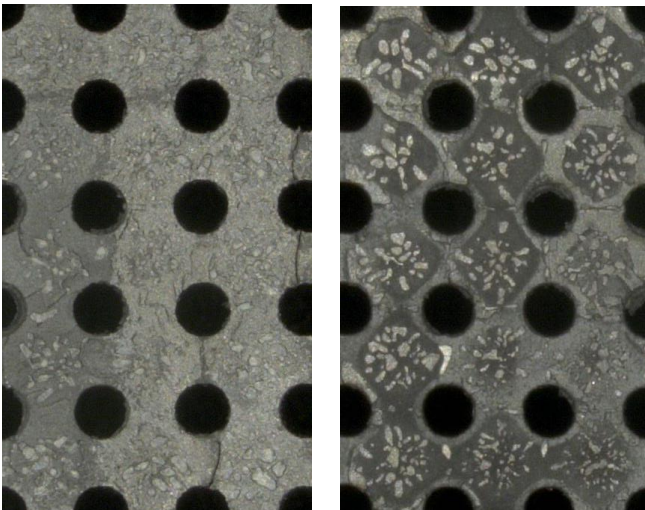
Exposed Pad solder joints with via in pad design that had the component pulled from the PCB. Black areas are Plated Through holes. Light gray areas are soldered areas. Dark gray areas are Hot Tear. The left solder joint was soldered with SAC305 and the right with Innolot.
